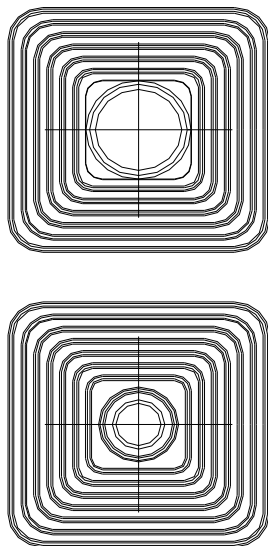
IRT-4M Fuel Assembly Cross Section.
